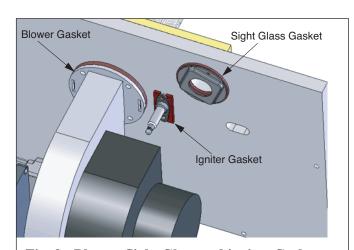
Blower, Sight Glass and ignitor Gaskets
